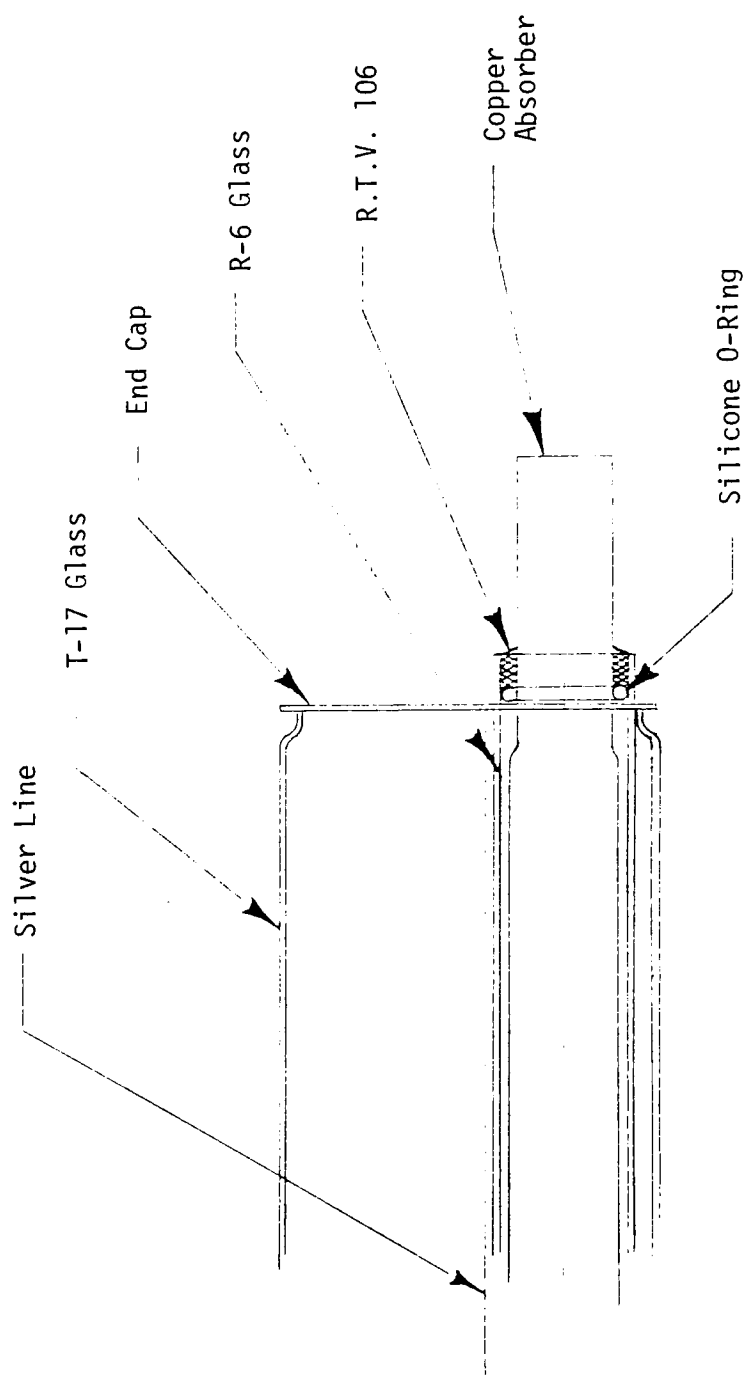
Single Tubular Collection Element Cross Section With End Plate
